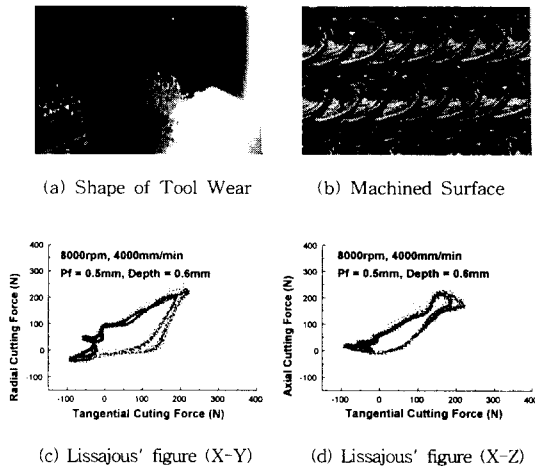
Characteristics of Tool Wear, Machined Surface and Lissajous' figure When Tool Wear is 0.297mm
